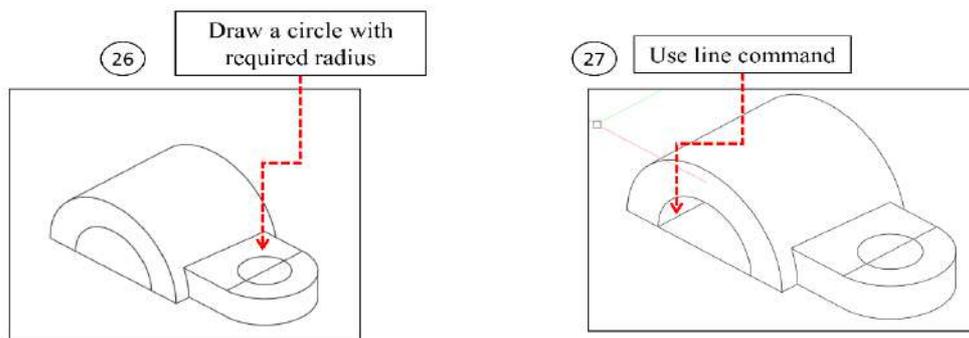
Example of an isometric drawing (Step 26 and 27)
